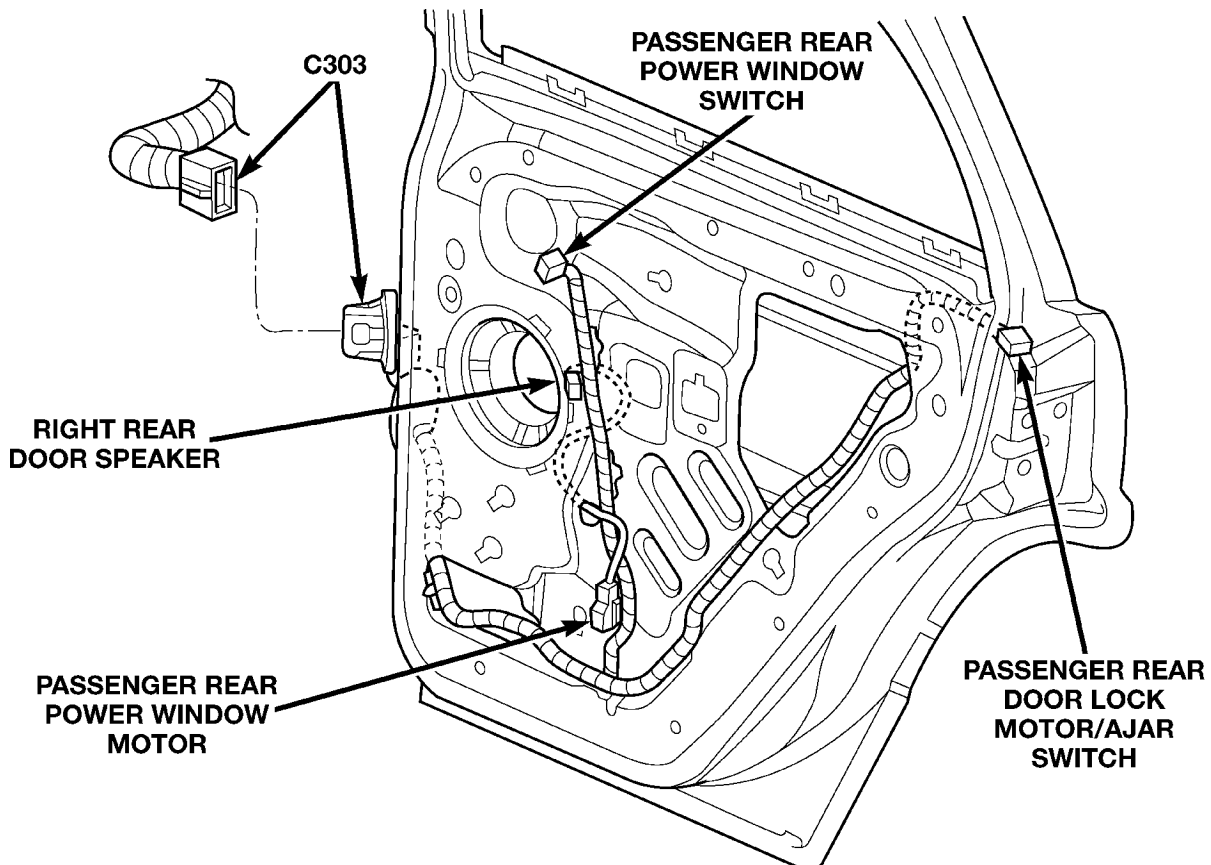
Door Connections (Rear Door, Passenger Side) — LHD
